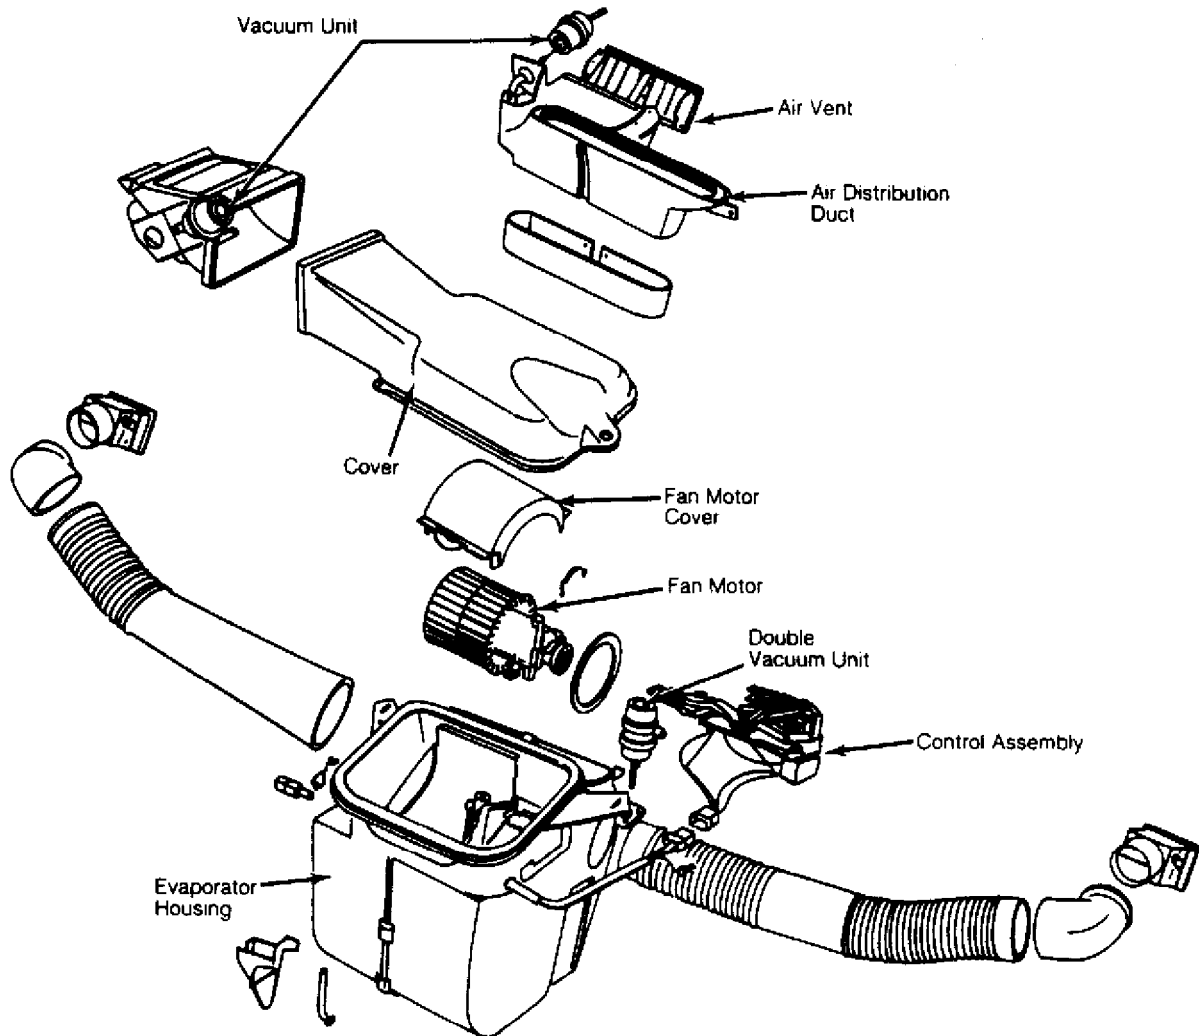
Exploded View of Manual A/C-Heater System Components (Cabriolet)
